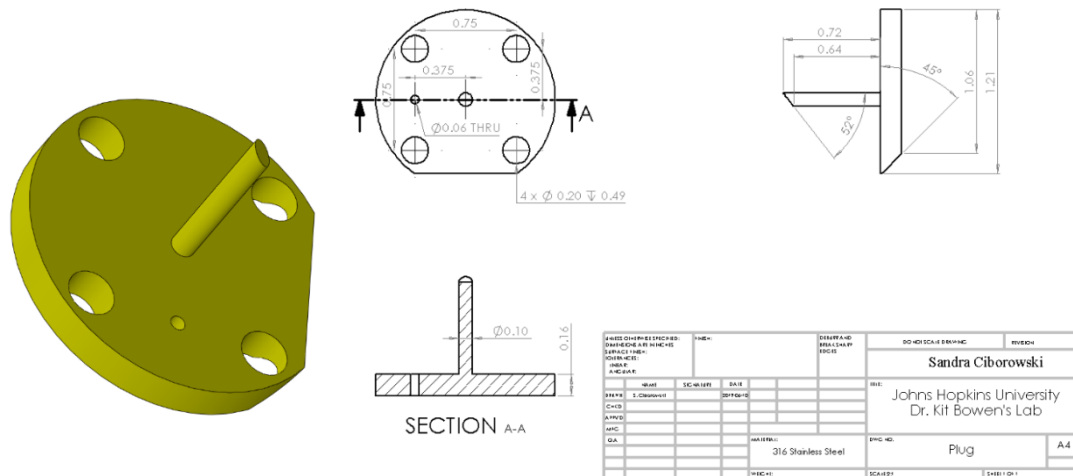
Plug for Pulse Valve Opening on 2-Pulse Valve Housing.
